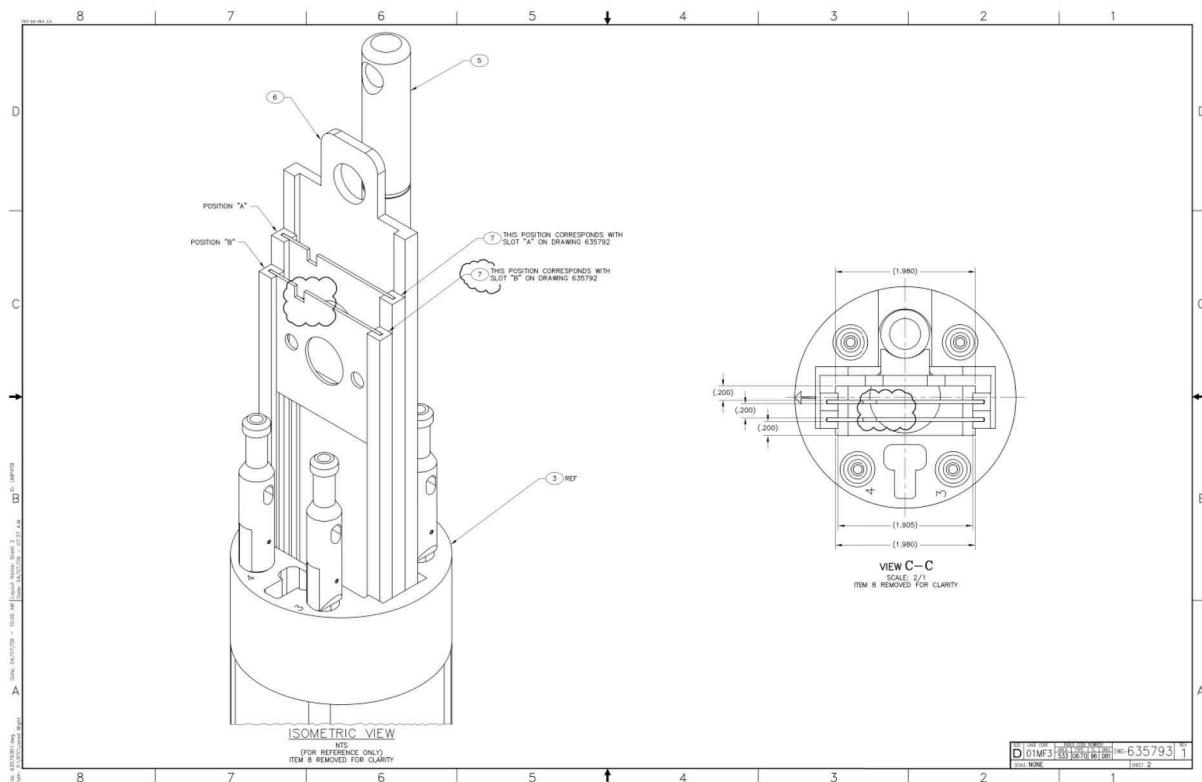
DWG 635793 ATR Full Size Plate in Center Flux Trap Position (AFIP) Test Train Assembly.
